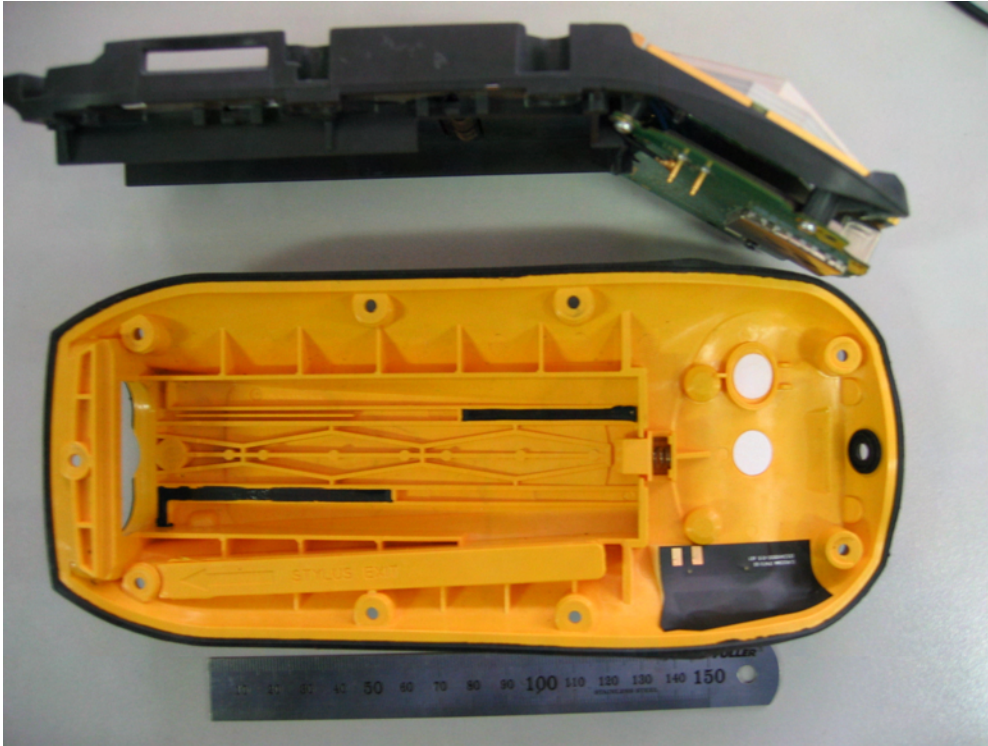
Side view of Chassis Showing Sensor Board Antenna Pins, alongside lower assembly fitted with GSM /Pentaband Foil antenna.
